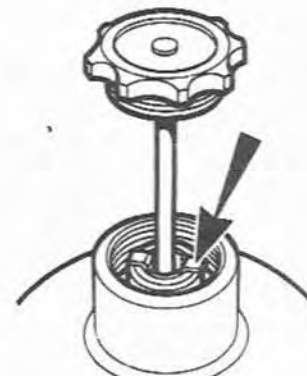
Damper retaining clip fitted in the piston rod (Sec 8)
